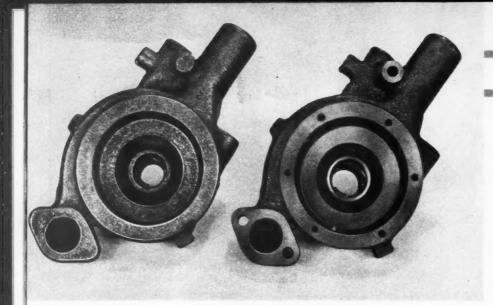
Rough casting and finish-machined water-pump body. All the operations are performed on one transfer machine, seen in heading illustration
